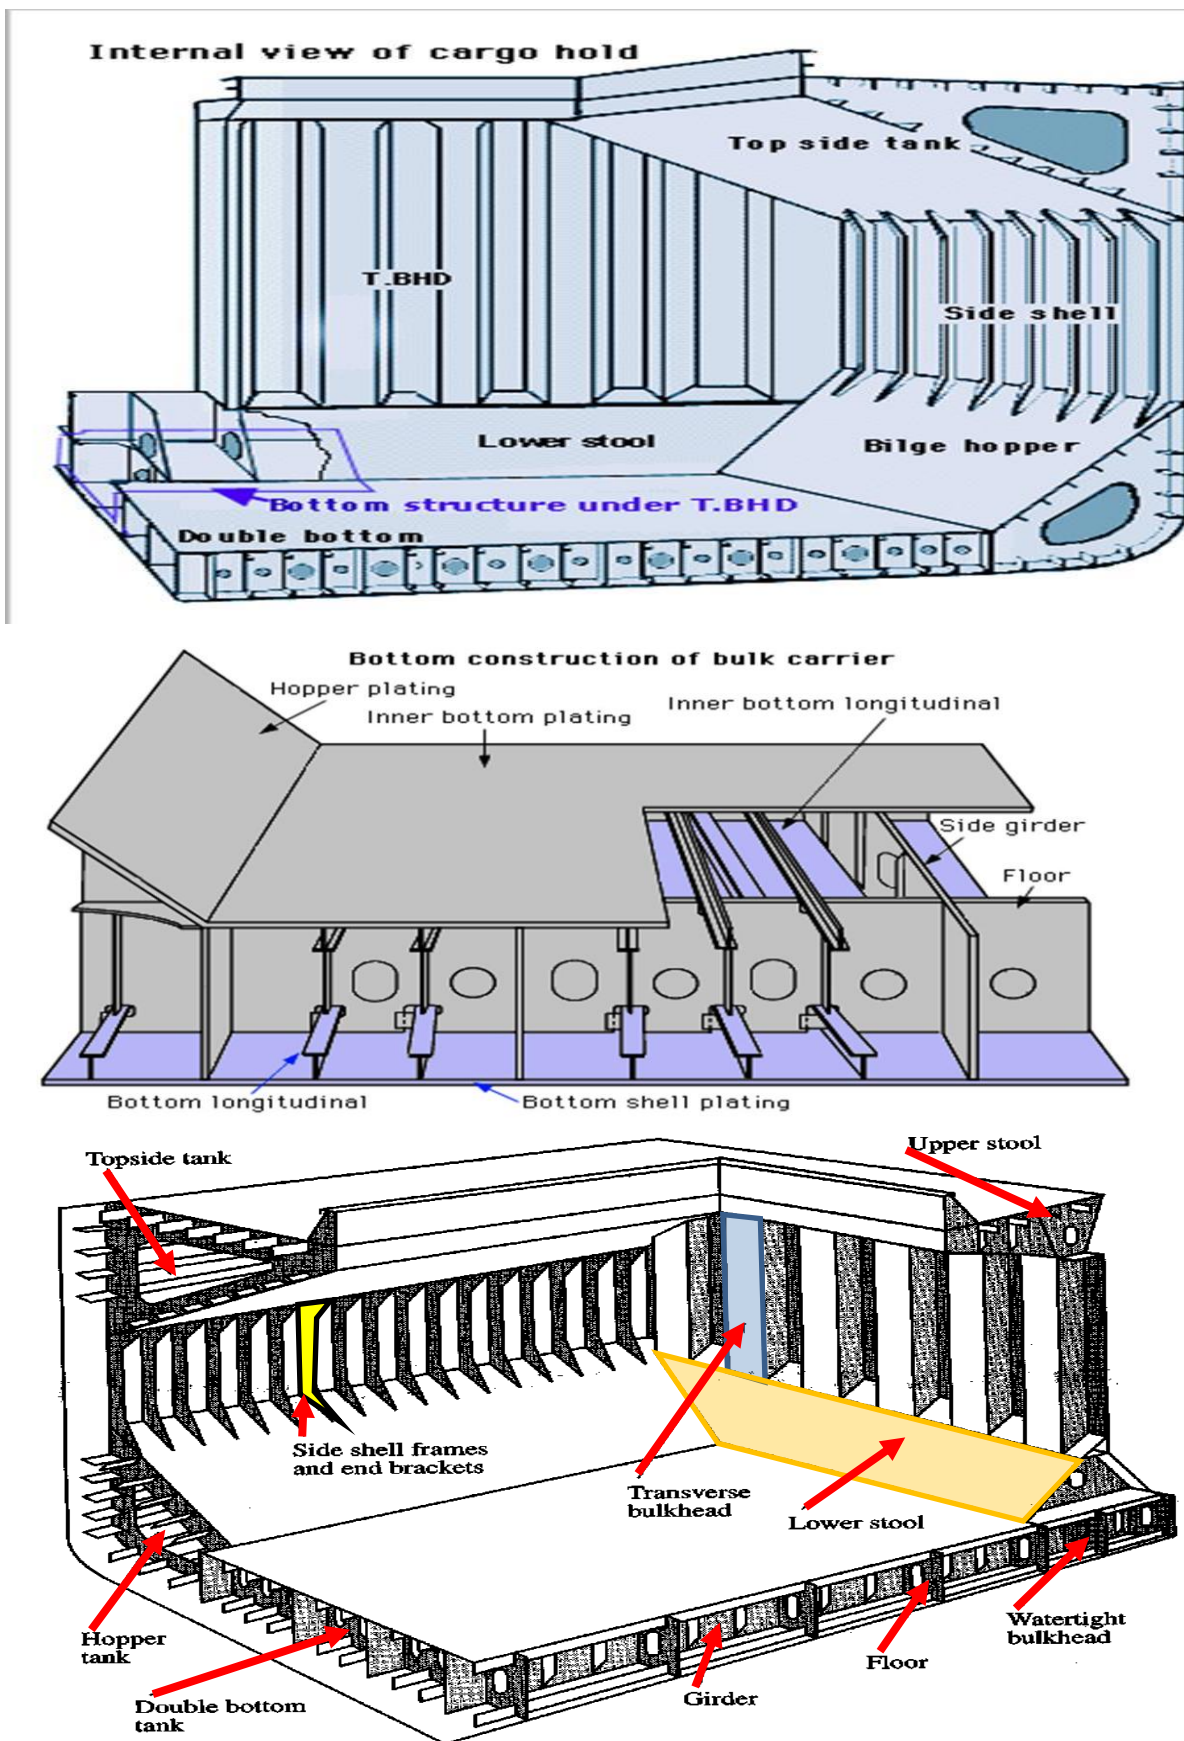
PARTS OF CARGO HOLD SINGLE SKIN BULK CARRIER
